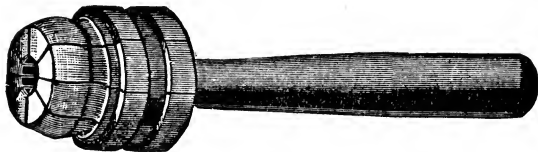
,977.—Prosser segment tube expander. *It consists of a number of segments and a taper pin. The segments are held in place by a spring. The outside surface of the segments have the form to be given to the expanded tube, and the inside is a straight hollow cone into which the steel taper pin fits. In operation the segments are forced apart in expanding the tube by hammering on the steel pin. This type of expander requires careful handling in order not to injure the tube. The hammering should be done gradually and the expander turned frequently.
